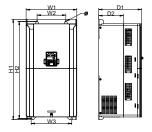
Wall mounting of 3PH 400V 45-75kW VFDs
